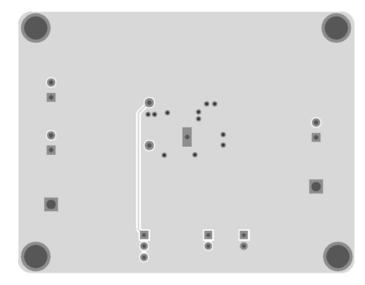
AAT3692 Evaluation Board Bottom Side Layout.
